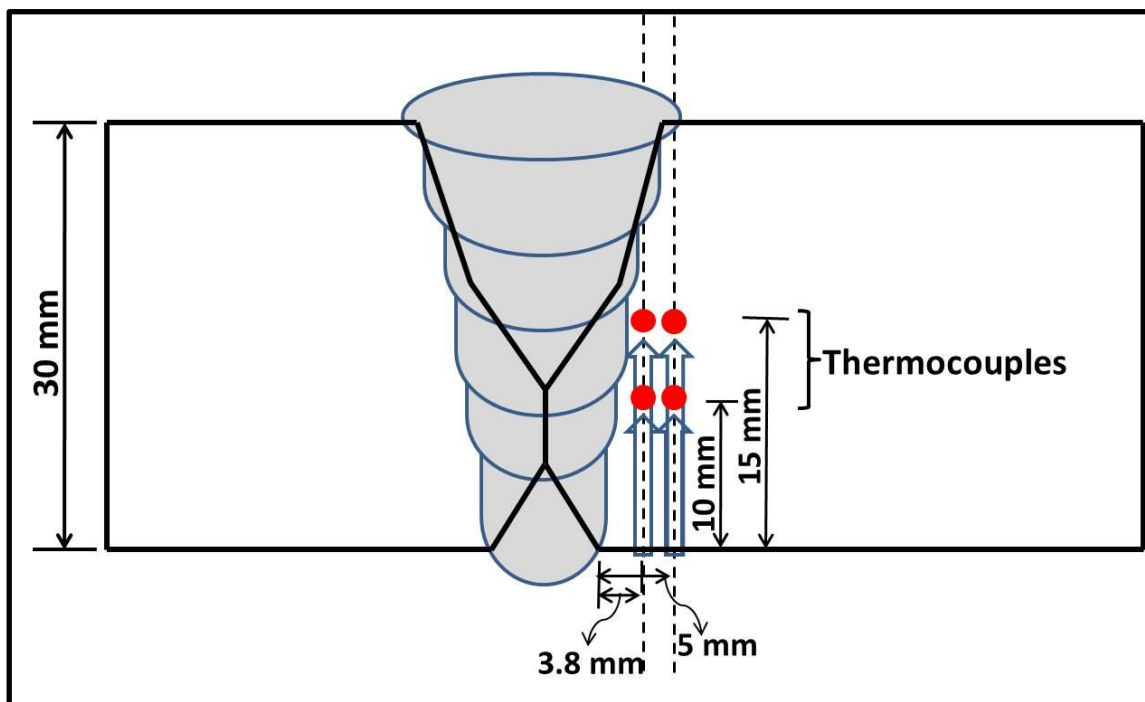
Submerged arc full welds thermocouples positioning
